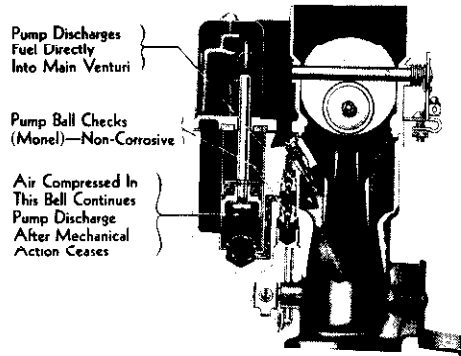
Illustration No. 19—Sectional View (A) of Carburetor J-15, J-20 and J-25 Models
